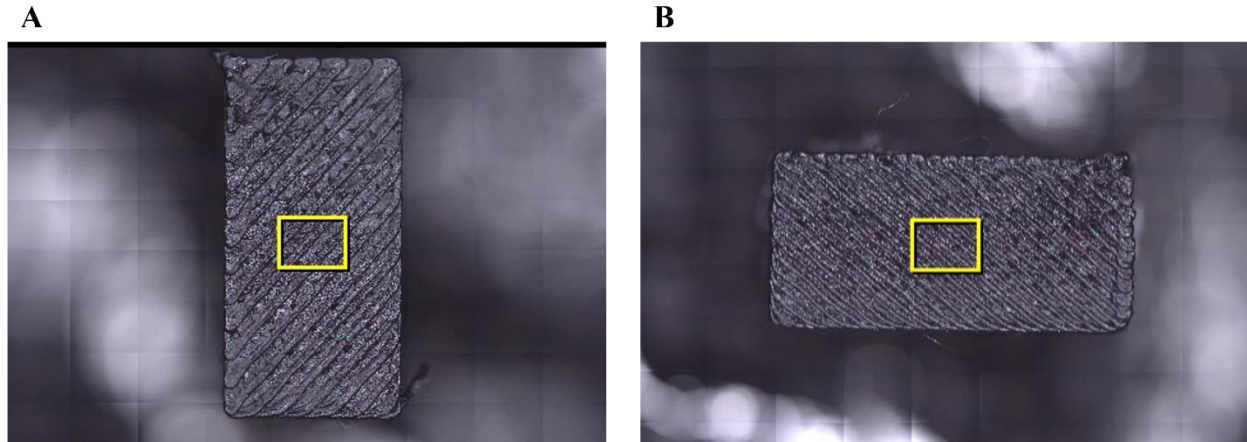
Arrangement of specimens under VK-X for A) Site A and B) Site B.
